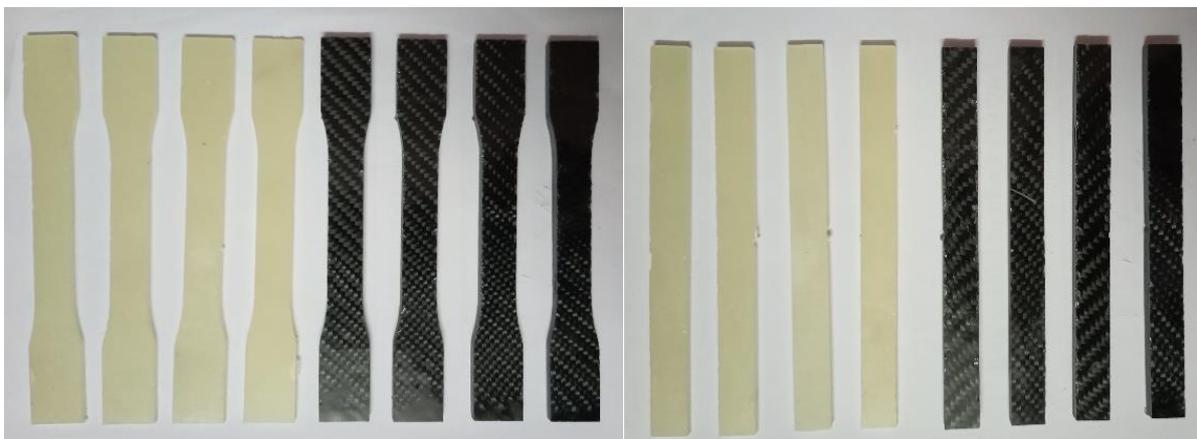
Abrasive Water Jet Machining & Cut Specimens
